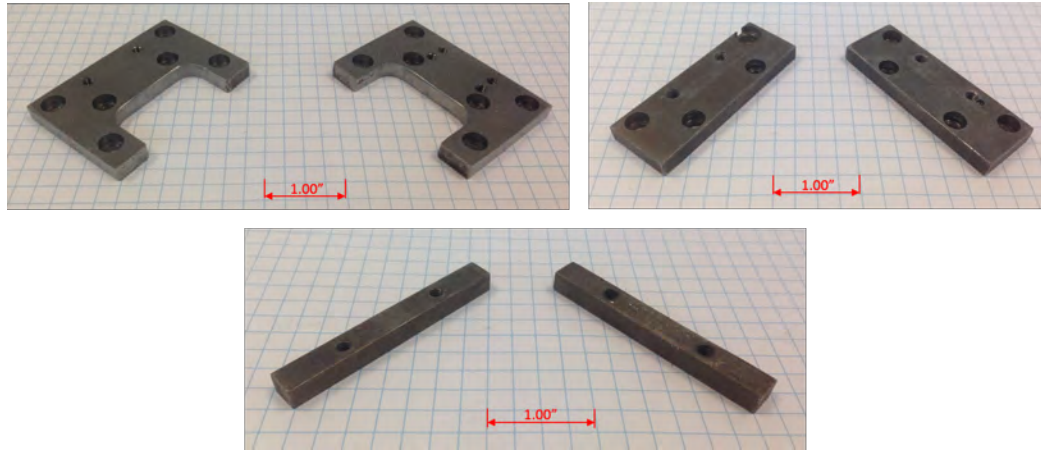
Ribbon clamps used as part of the transfer assemblies to maintain geometry and prestrain on the base plate. (Top left) Upper ribbon clamp for coupon size samples, (Top right) upper ribbon clamp for large geometry samples, and (Bottom) lower ribbon clamp.
